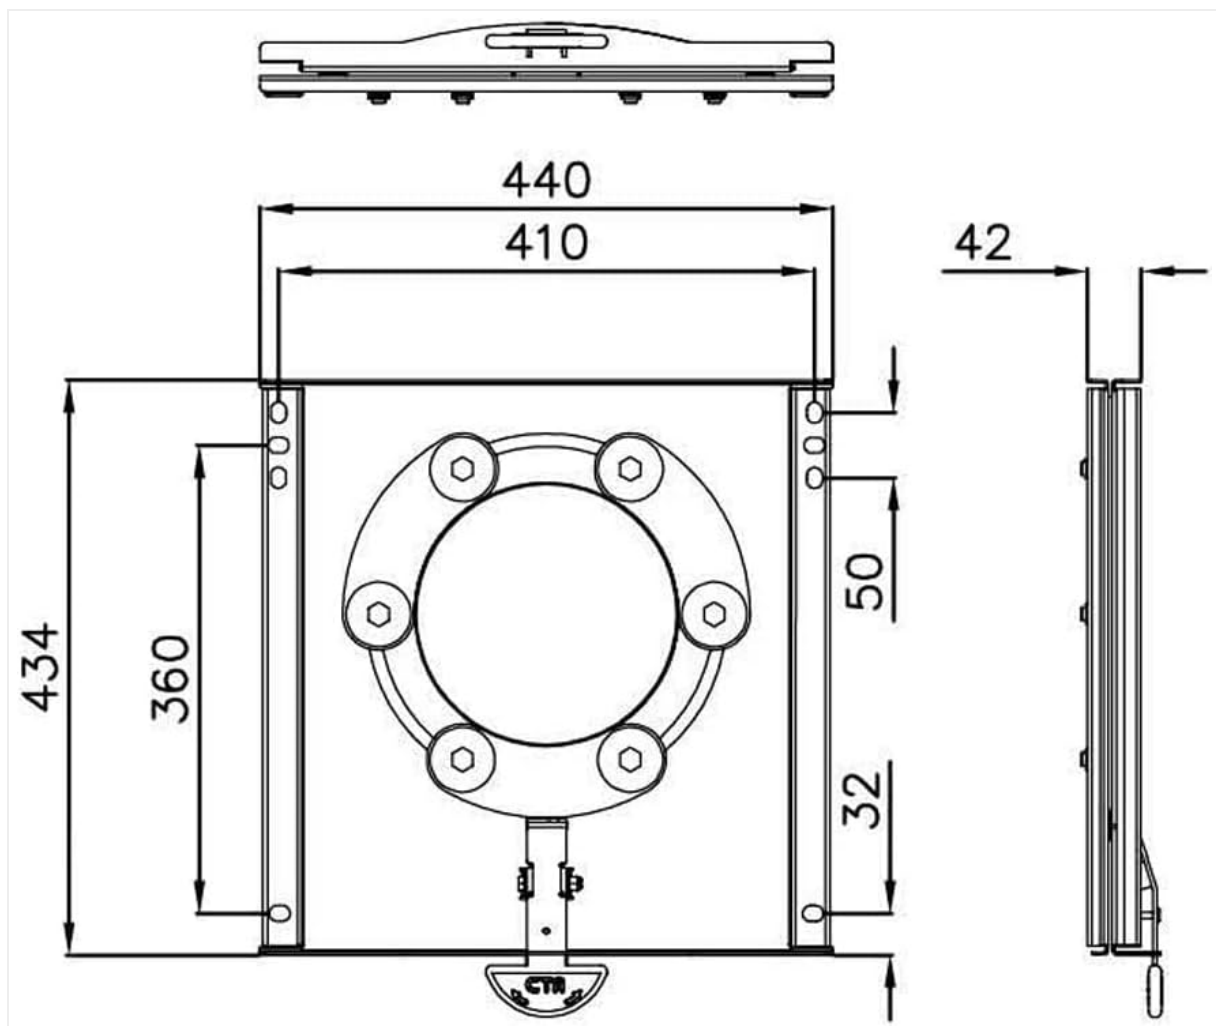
Technical drawing illustrating the dimensions of the swivel console in millimeters.
